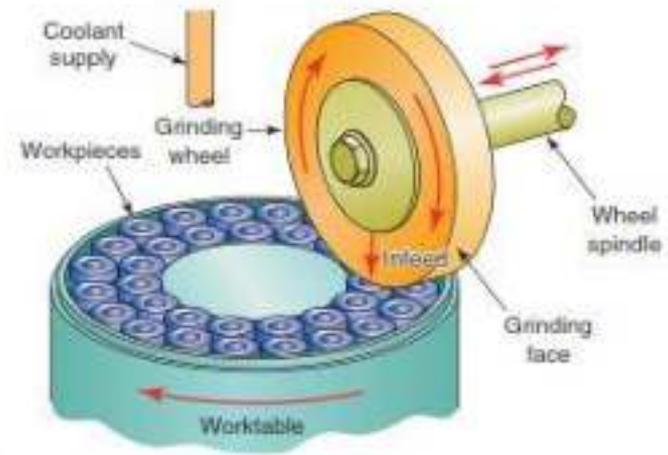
Principle of the type II surface grinder. Sometimes circular parts are centered on this grinder; the resulting concentric scratch pattern is excellent for metal-to-metal seals of mating parts.
